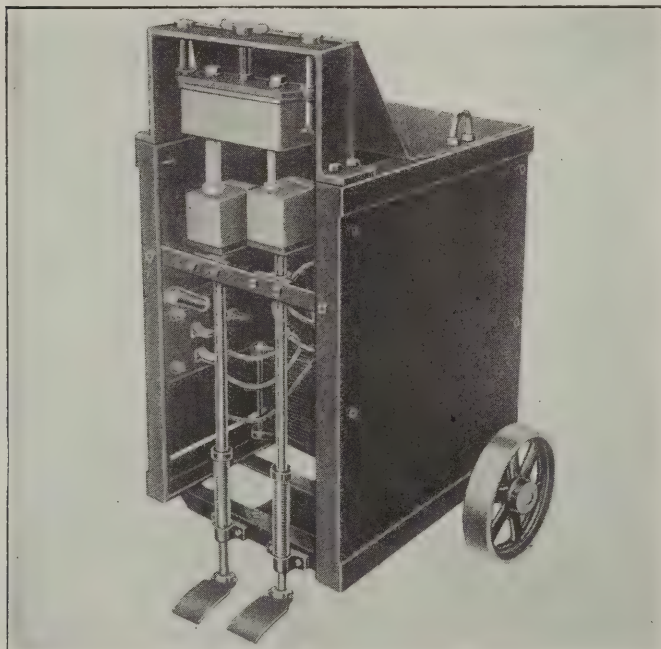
United States Electric Rivet Heater Heats Rivets from $\frac{3}{8}$ in. to $1\frac{1}{2}$ in. in Diameter in Lengths up to 6 in. Without Adjustment
